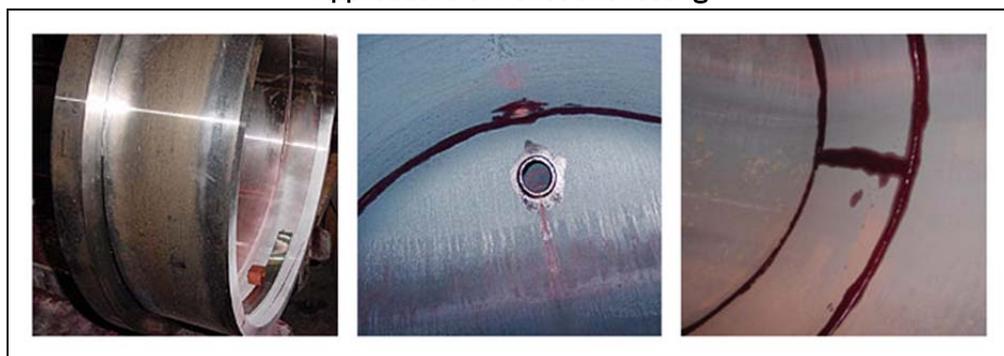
From left to right: crack identification in an extrusion ring on the suspicious area which was previously inspected by ultrasonic testing, inspection of welds on two different vessels [WS14]
